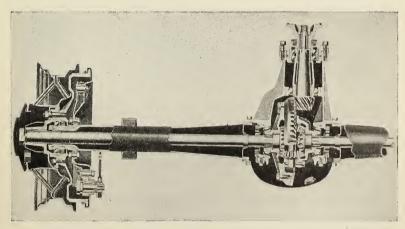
The drive shaft connects the transmission gears with the differential. (Courtesy Cadillac Motor Car Co.)
